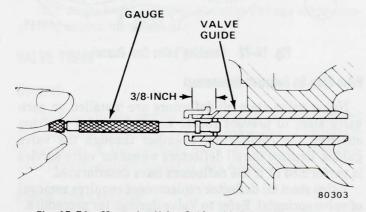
B-74 Measuring Valve Guide with Telescoping Gauge
